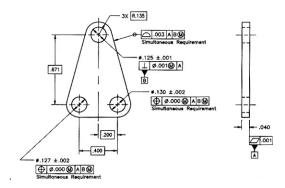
Example of mechanical technical drawing with indication of geometric tolerances
